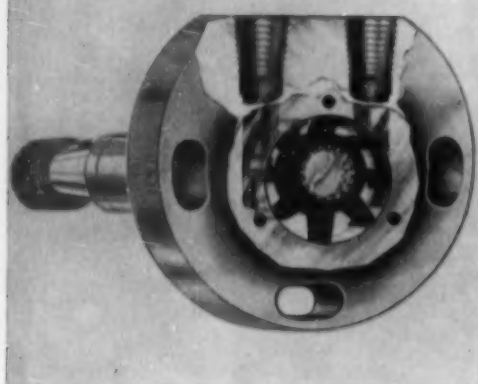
Fuel supply pump which is mounted on forward end of pump housing.
